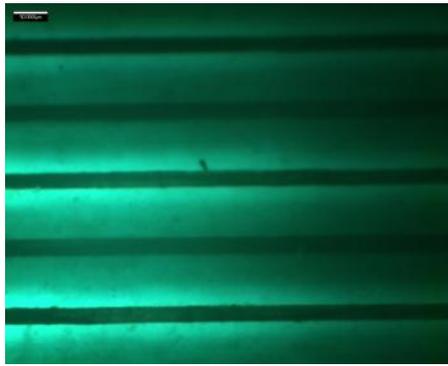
Identified copper dendrite on TV2 layer 8, solder mask partially removed by grinding, UV lamp applied
